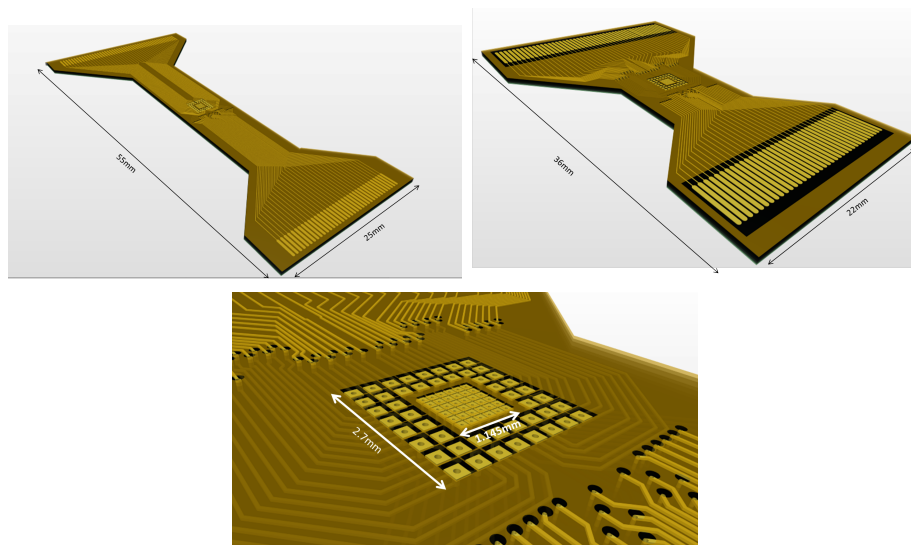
(a)Profile of the First version Flexible PCB (b)Profile of the Final Flexible PCB Layout (c) A Close-Up View of the Contact Pad Array
